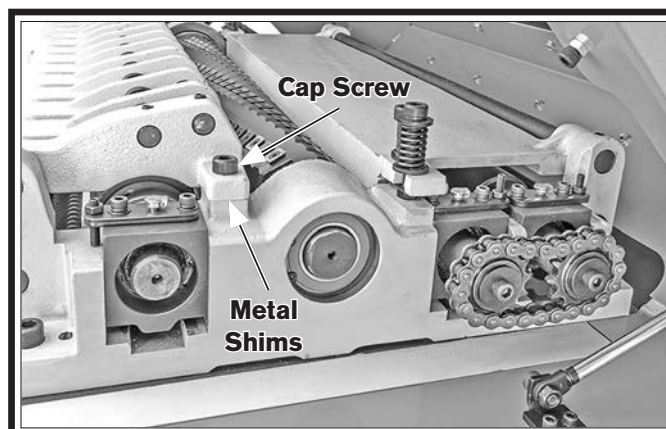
Location of outfeed roller bearing blocks and height adjustment controls (left side).
